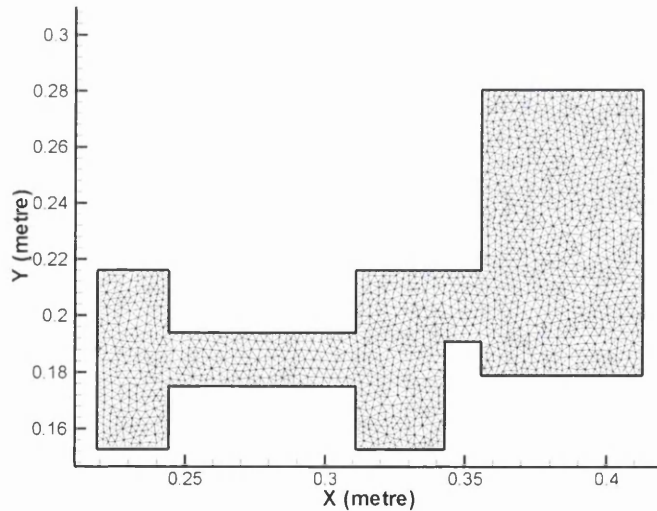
Gear Blank casting model with mesh used to obtain distribution of points for calculating radius and distance ratios
